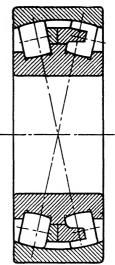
SKEFKO SELF-ALIGNING DOUBLE ROLLER BEARING WITH BARREL SHAPED ROLLERS TO FIT OVER SPHERICAL RACE
